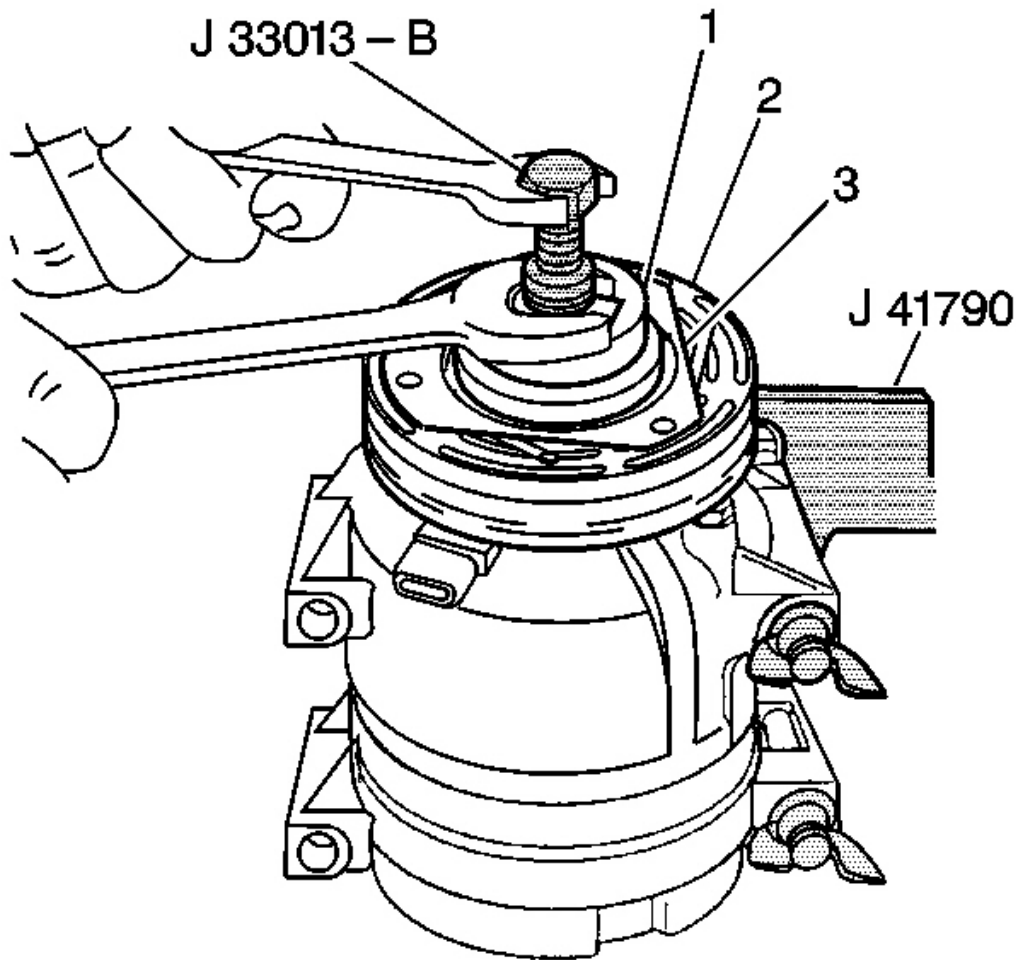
J 33013-B, Clutch Plate & Hub Assembly
